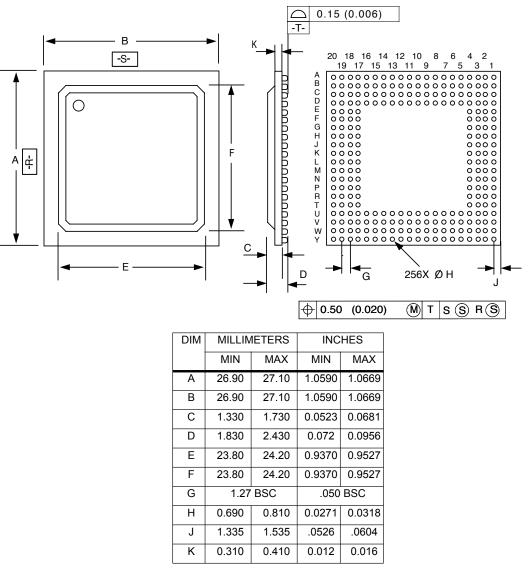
256-pin OMPAC PBGA (Preliminary Drawing)
